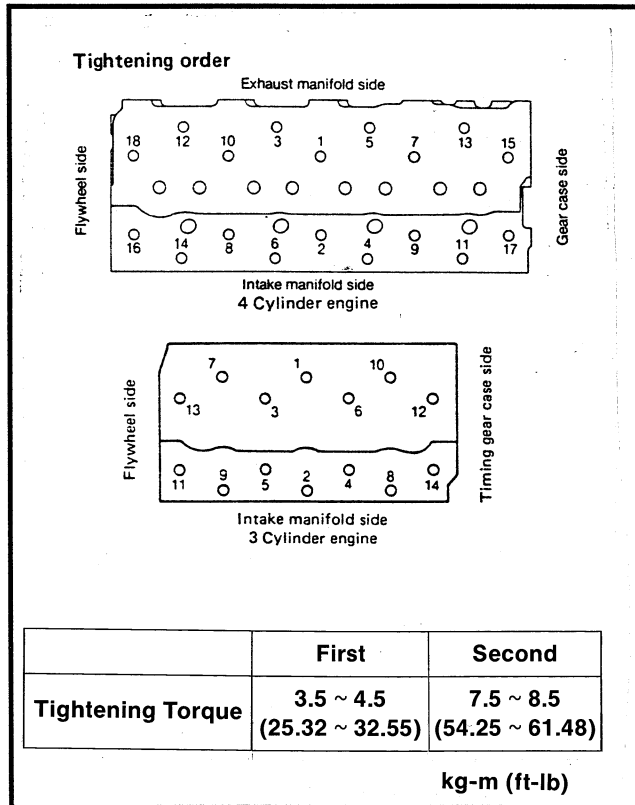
Cylinder Head Tightening Sequence and Torque Values
